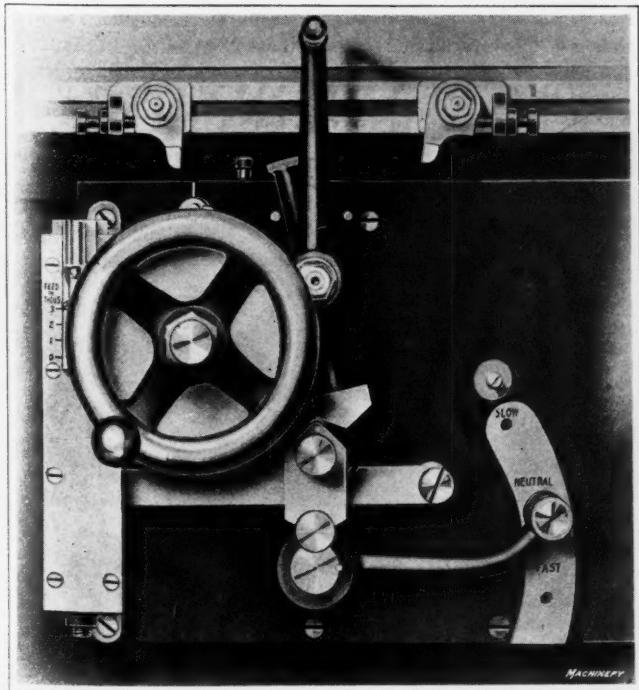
Feed Mechanism of Webster & Perks Grinder
